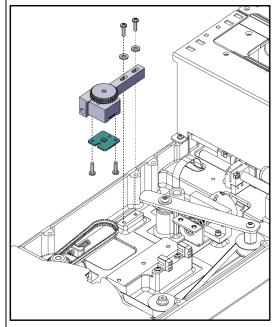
Magnetic Rotary Encoder Board Assembly inside Biopsy Arm
